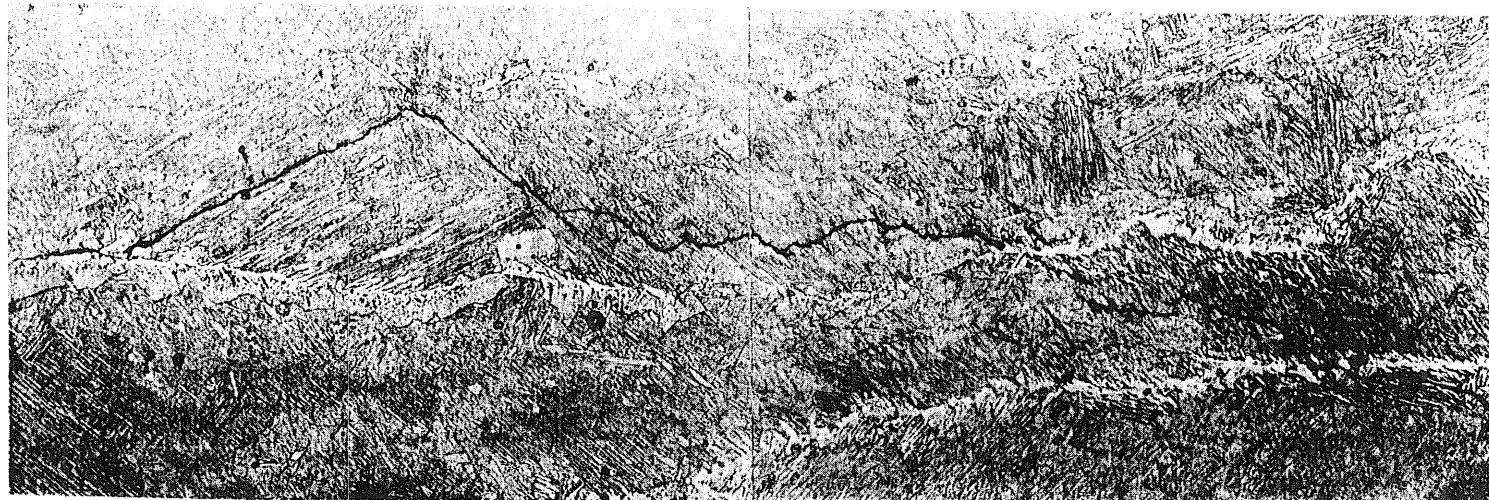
Crack in Weld Metal of Specimen P- $\frac{3}{8}$ -3
